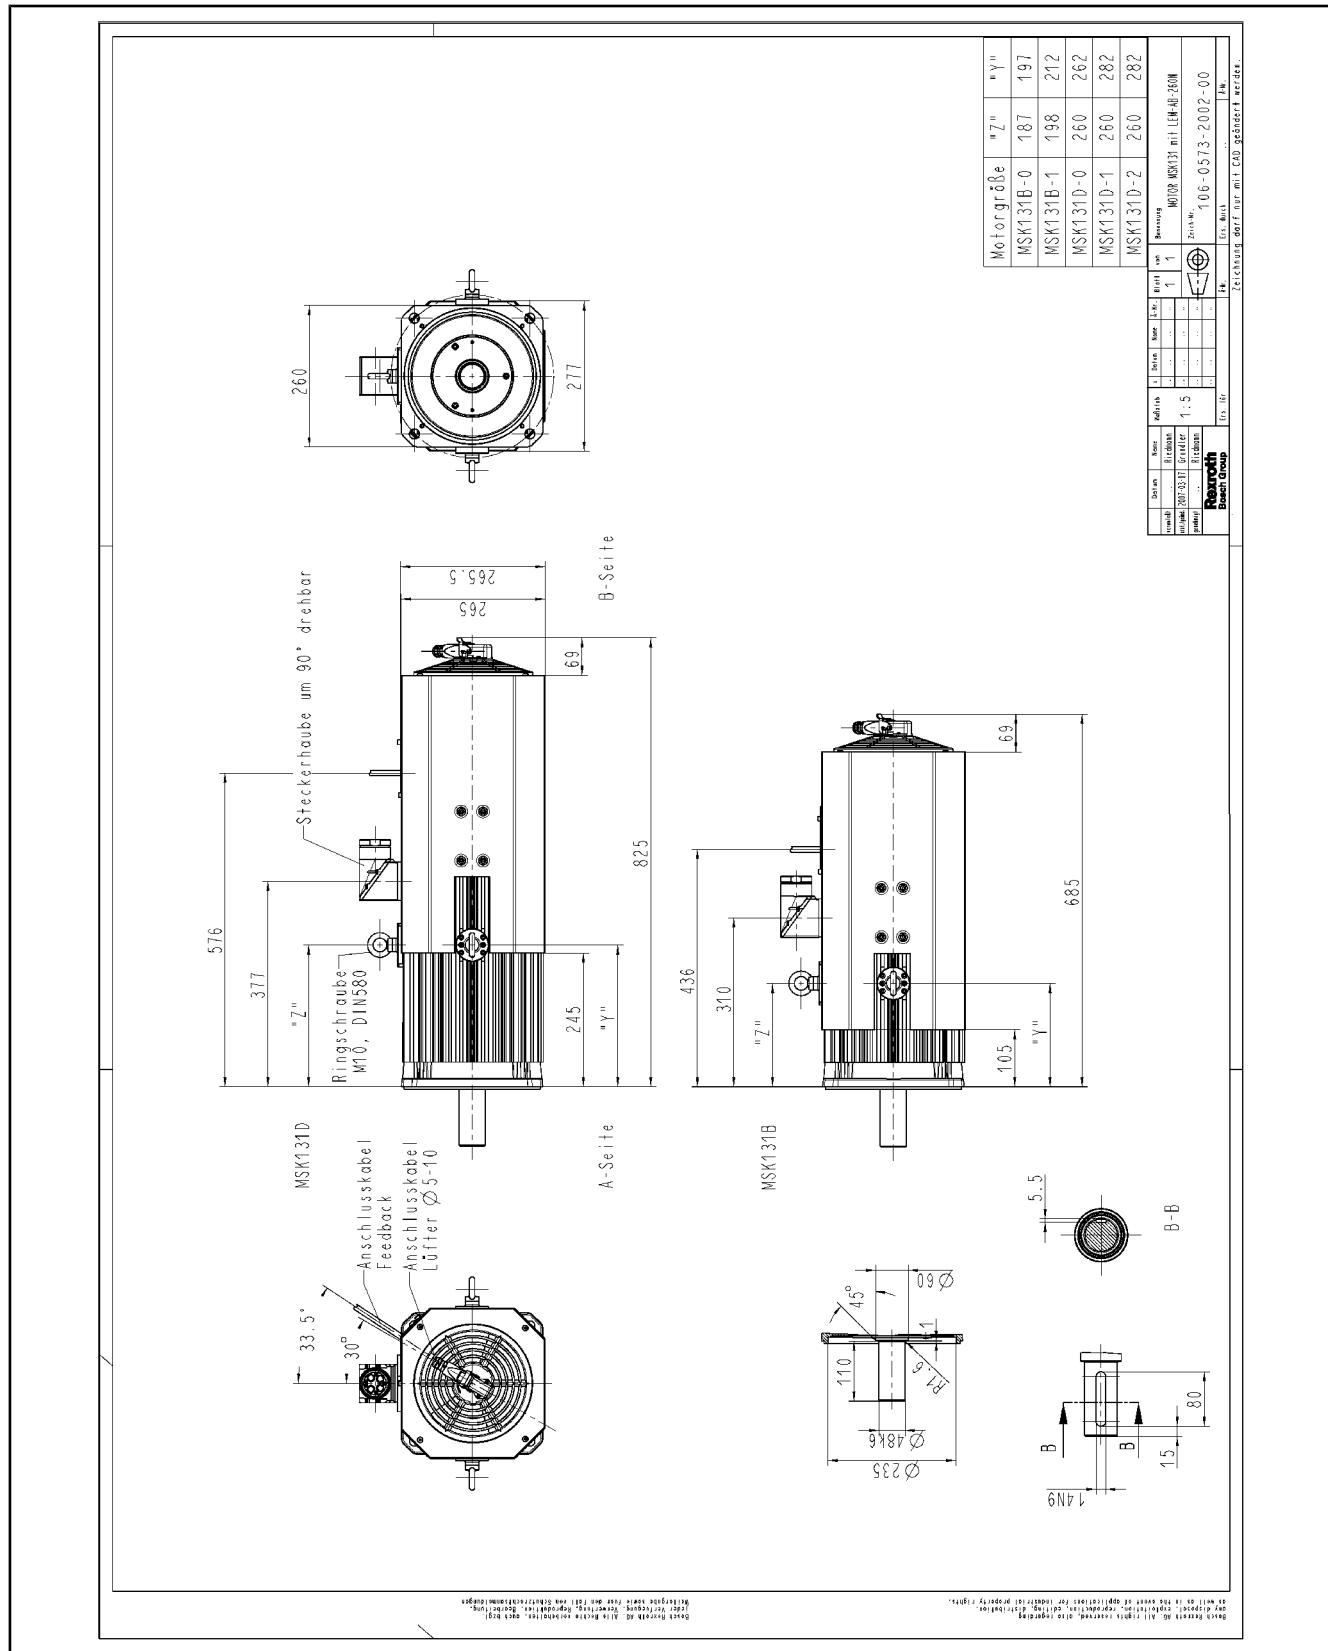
Dimension sheet MSK131 with axial fan unit
